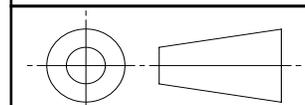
FITTING, REDUCER, ADAPTER, CONICAL END TO FLARED TUBE
